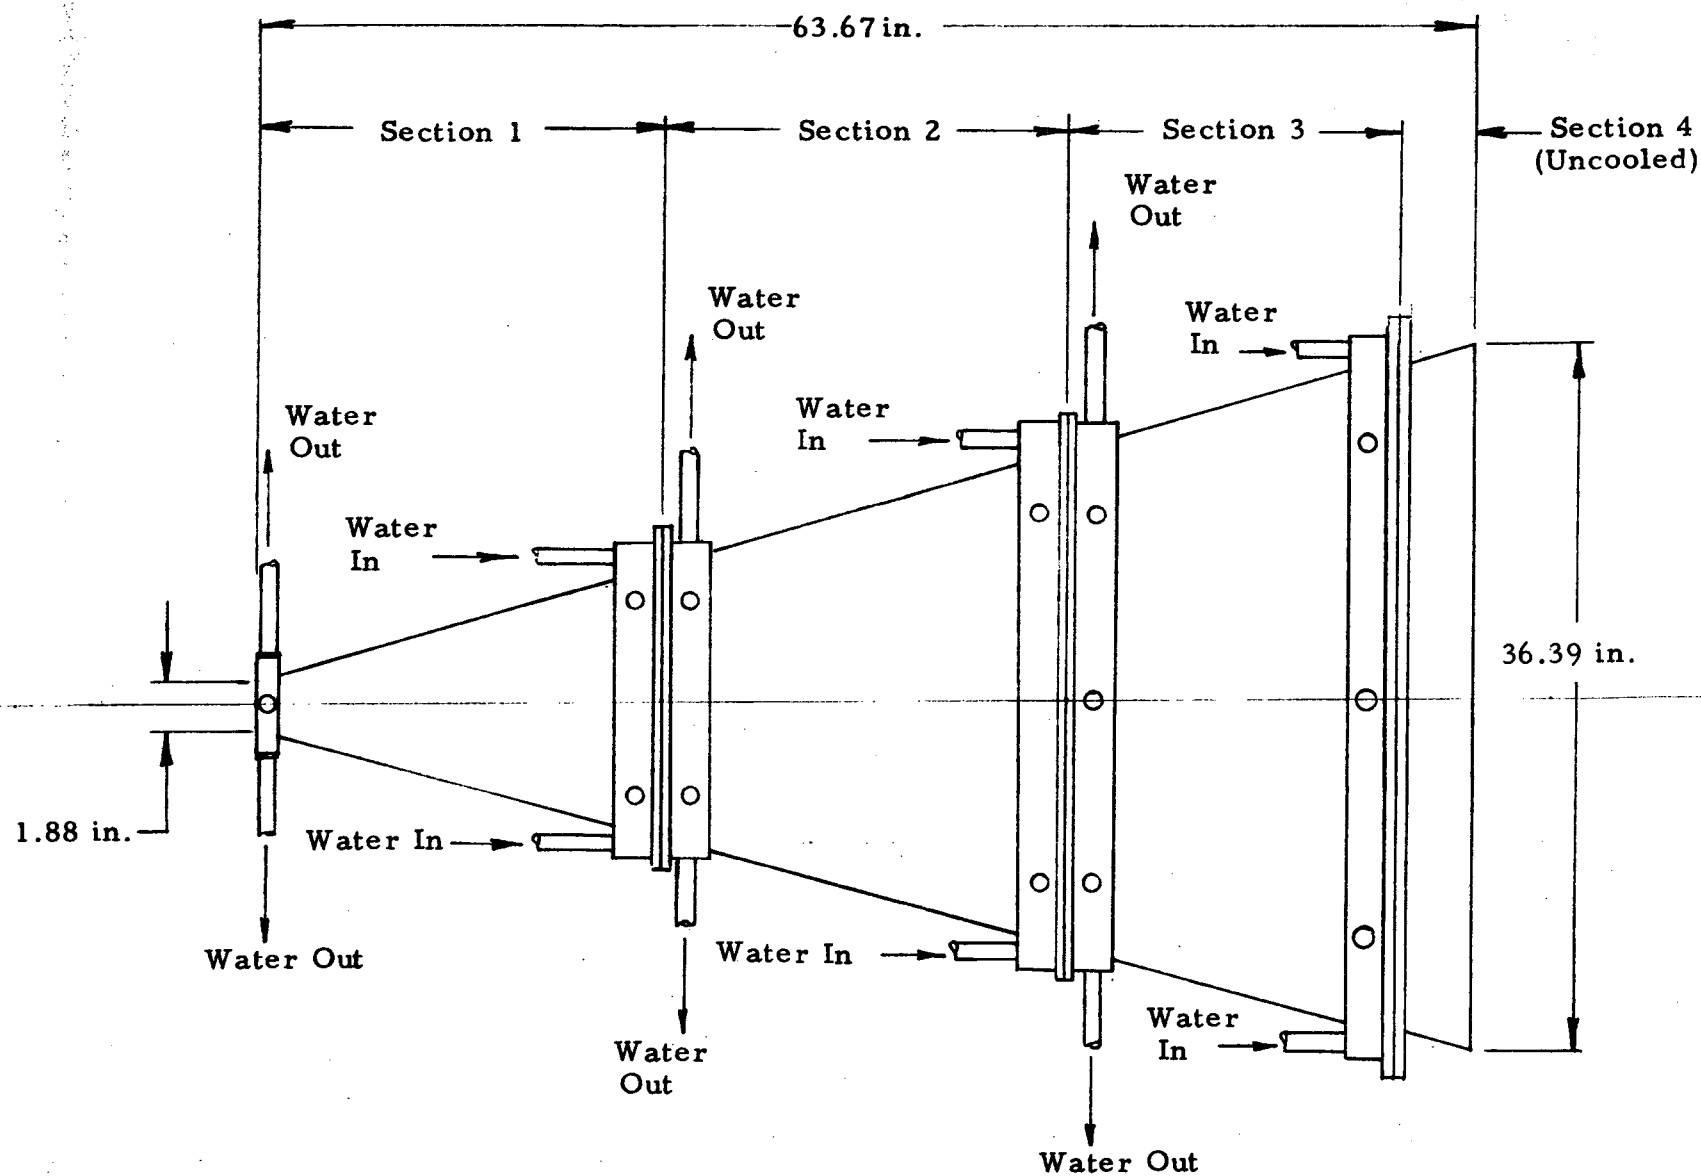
NASA-MSFC Hot Gas Test Facility Nozzle Assembly
